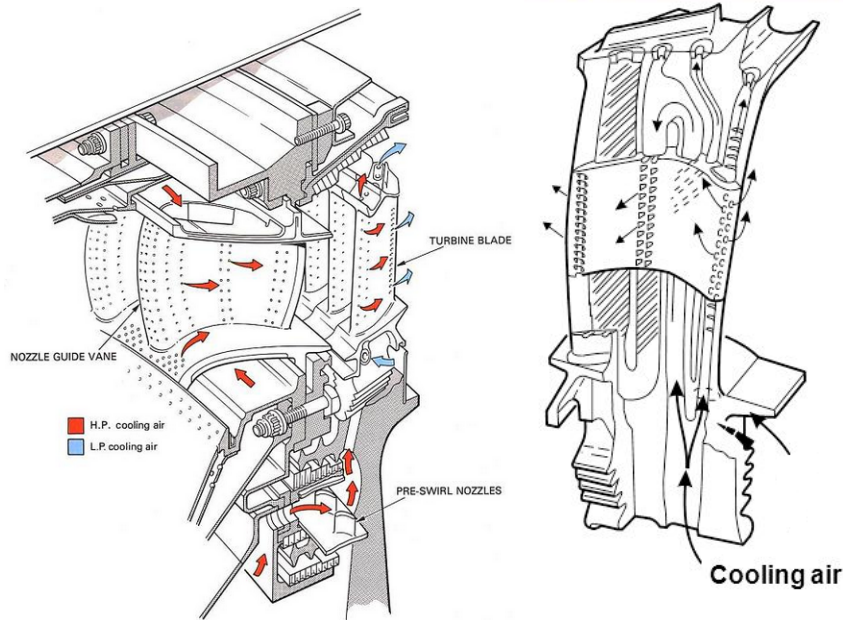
Film cooled turbine blade along with the cooling holes [4] [3].
